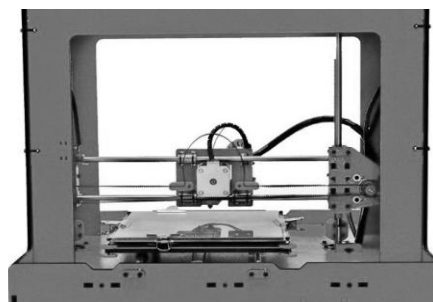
3D printing machine (Source: www.3ders.org) (adapted and modified).
